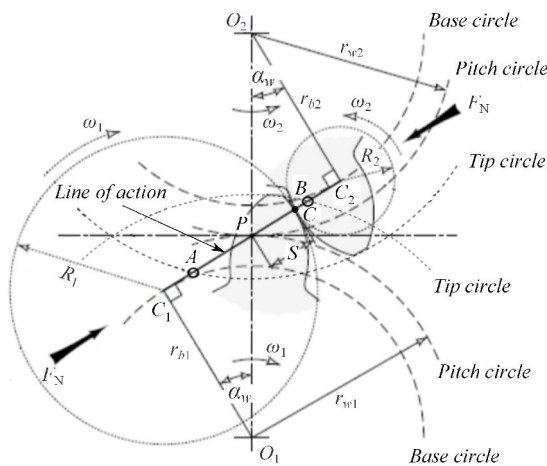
Contact of involute spur gear teeth (modified from [11]).
